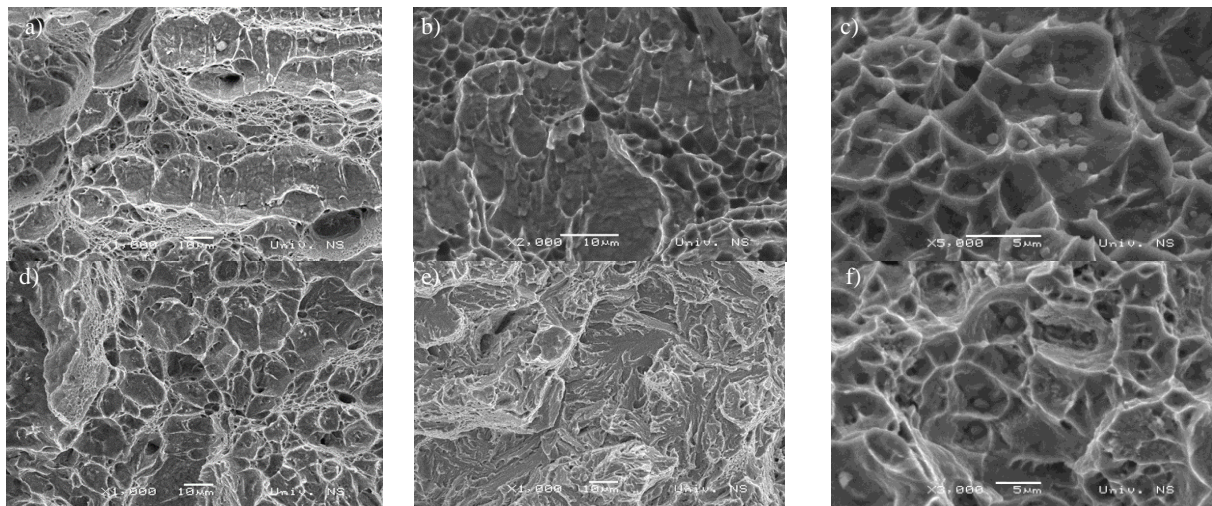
SEM fractograph of Charpy impact specimens fractured at 20 °C a) base metal, b) HAZ and c) weld metal. SEM fractograph of Charpy impact specimens fractured at -40 °C d) base metal, e) HAZ and f) weld metal.
